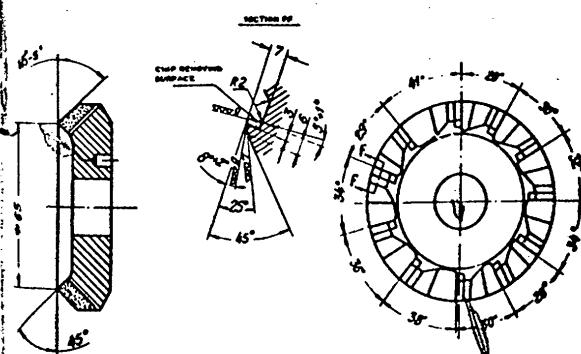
COUNTERBORE 636113 FOR MANUAL BURR OR VALVE SEATS
